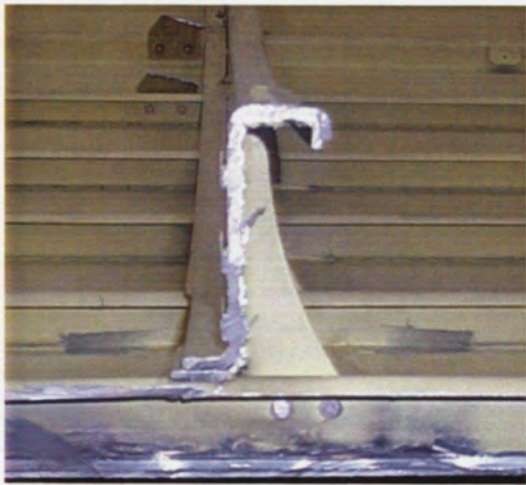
Frame and Stringer Details on Actual Aircraft panel
